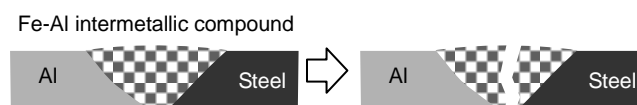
Generation of intermetallic compound in steel-to-aluminum alloy fusion weld
